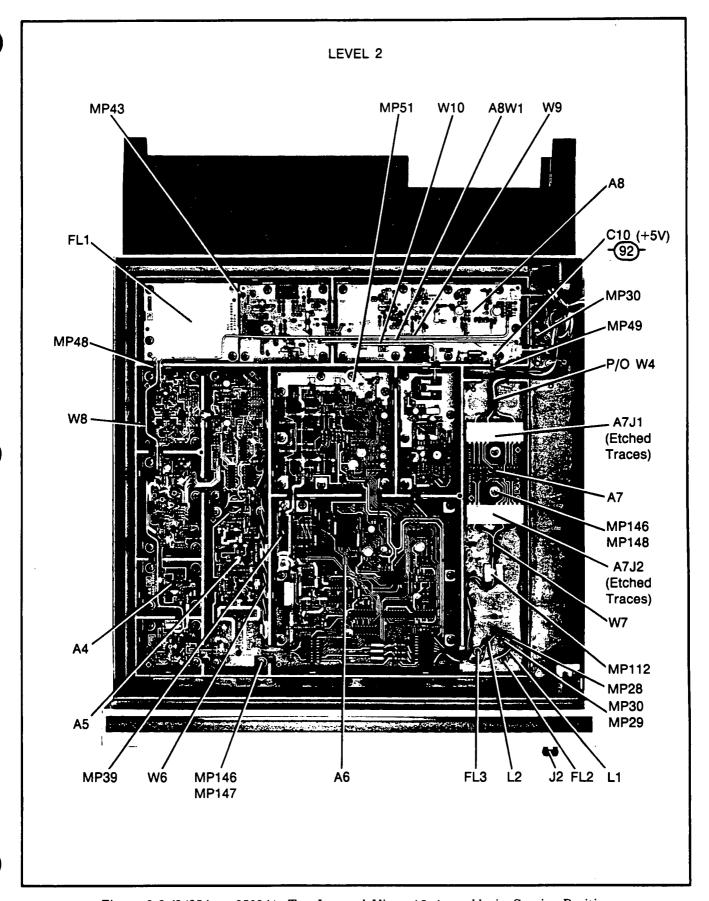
(2425A to 2509A). Top Internal View; A3 Assembly in Service Position
